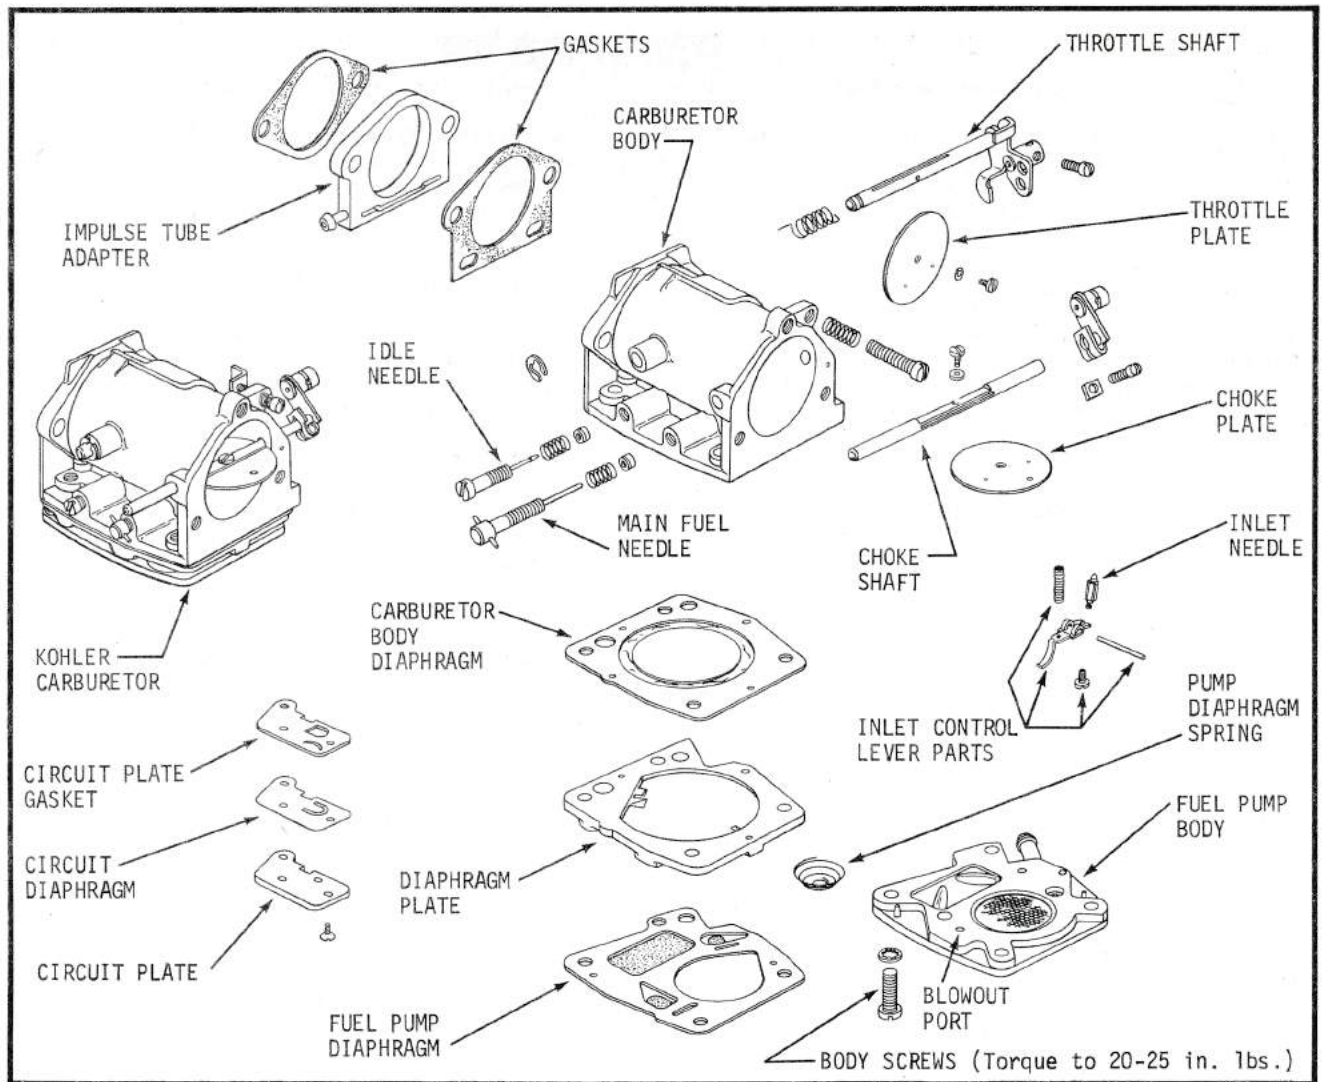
EXPLODED VIEW: KOHLER CARBURETOR
